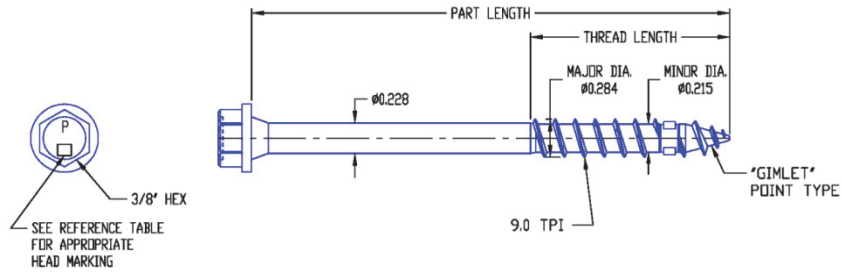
B—FASTENER SPECIFICATIONS FOR WOODWORM TRUSS SCREW
